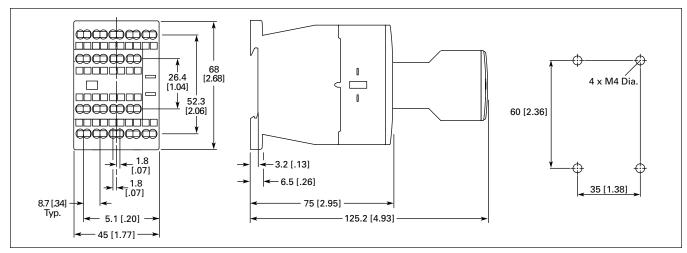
Frame B, XTCEC007B - XTCEC012B Contactors with Spring Cage Terminals (7 - 12A) — Approximate Dimensions in mm [in]
